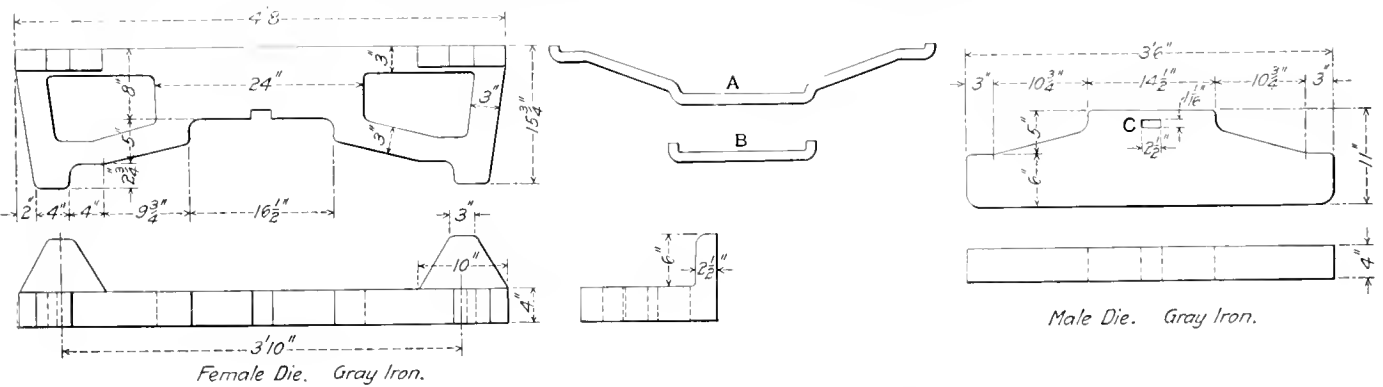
Bulldozer Dies for Forming Carry Irons.
